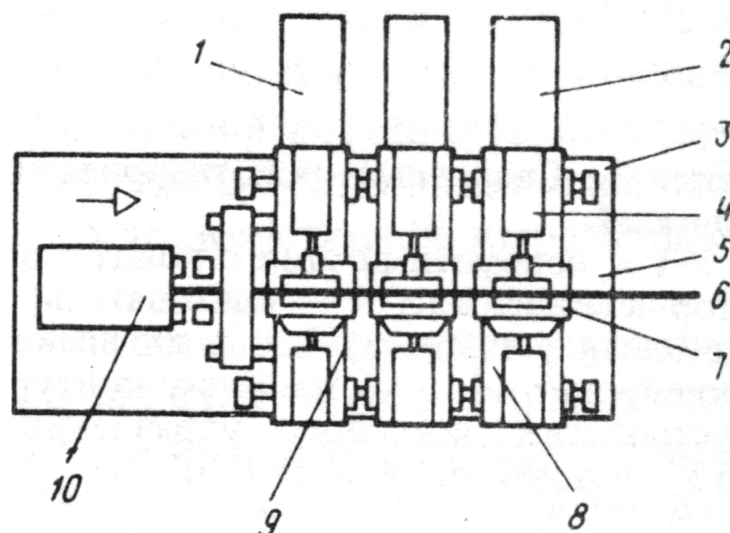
Automated line for making reinforcement bars with double anchor head: 1 - clutch; 2 - clutch pneumocylinder; 3 - leading grip; 4 - support; 5 - slide; 6 - wire; 7 - jaws; 8 - electroheating; 9 - upsetting heads; 10 - pneumocylinder for upsetting.
